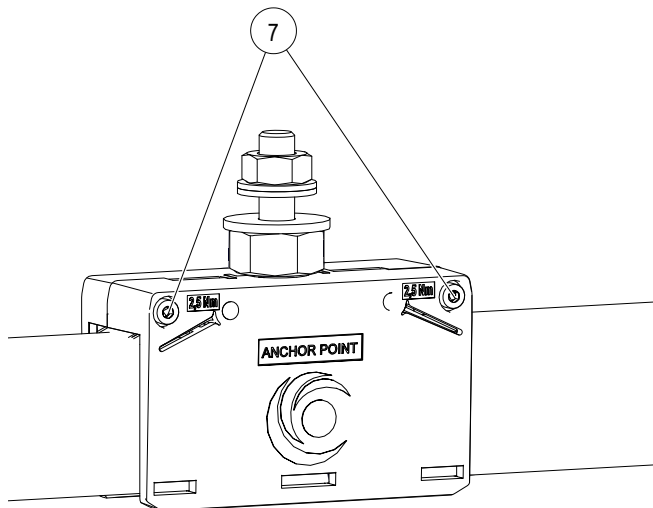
Tighten the cylinder screws (Item 7) of the fixed point.
